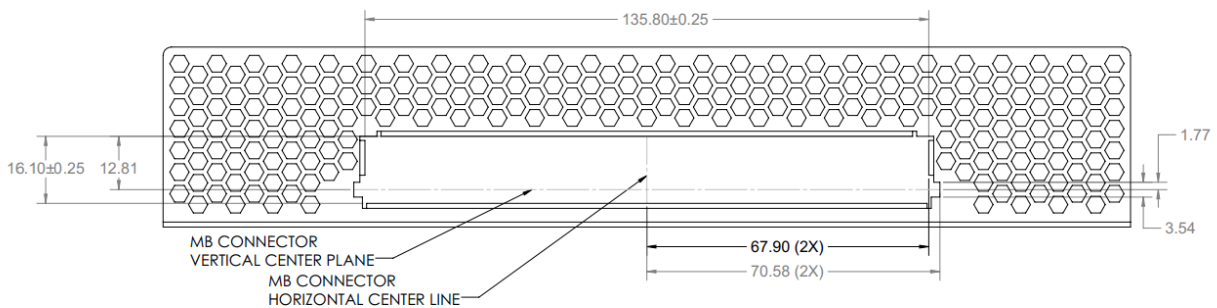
LFF Baseboard Chassis CTF Dimensions (Side View)
